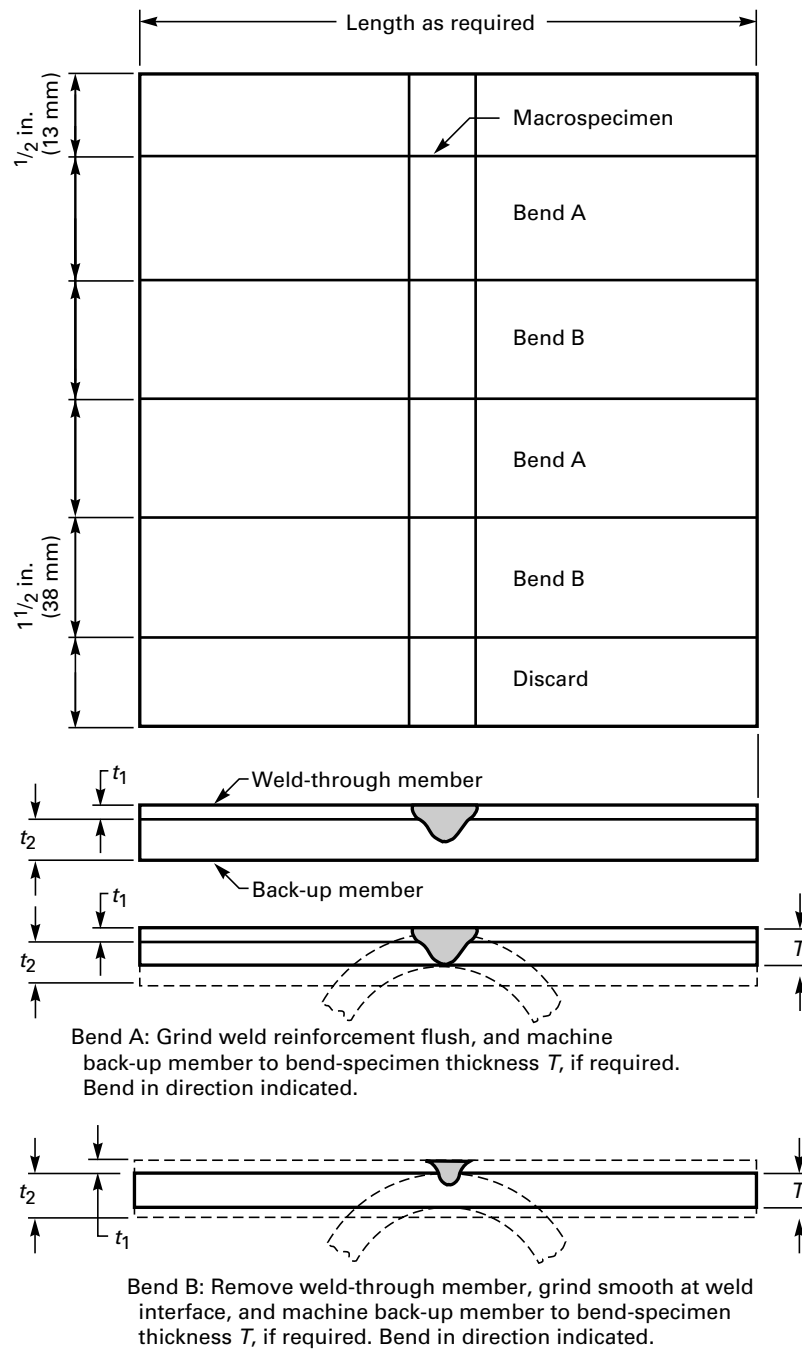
GAS TUNGSTEN-ARC SEAM WELD, PLASMA-ARC SEAM WELD, SUBMERGED-ARC SEAM WELD, AND LASER BEAM SEAM WELD TEST SPECIMEN FOR BEND TESTS
